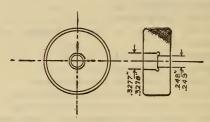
"Go" ring gage for diameter of shank shoulder and concentricity of serrated portion, A size
